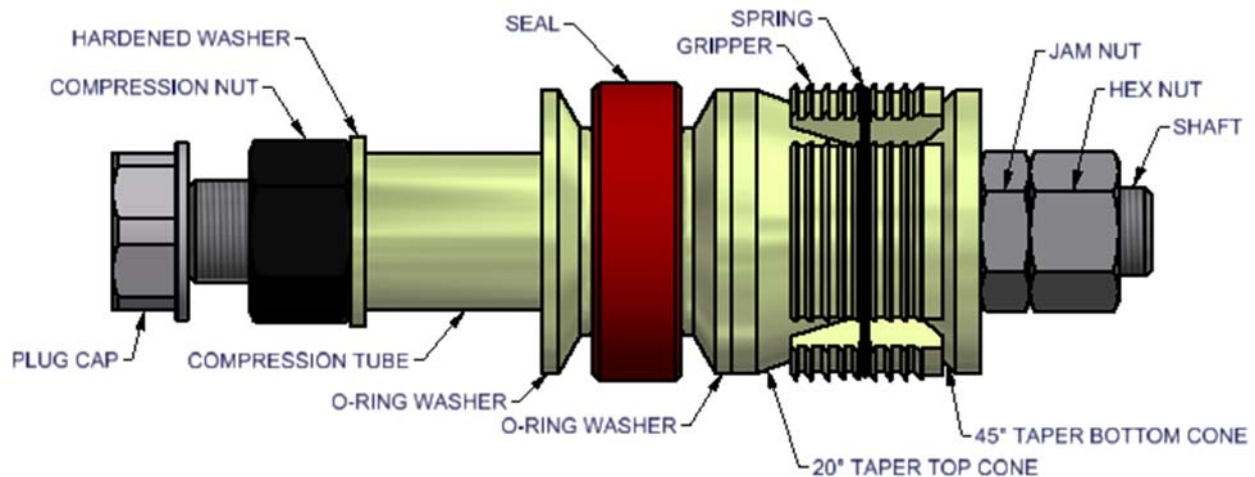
Single Shaft GripTight Reverse Pressure Test Plug
